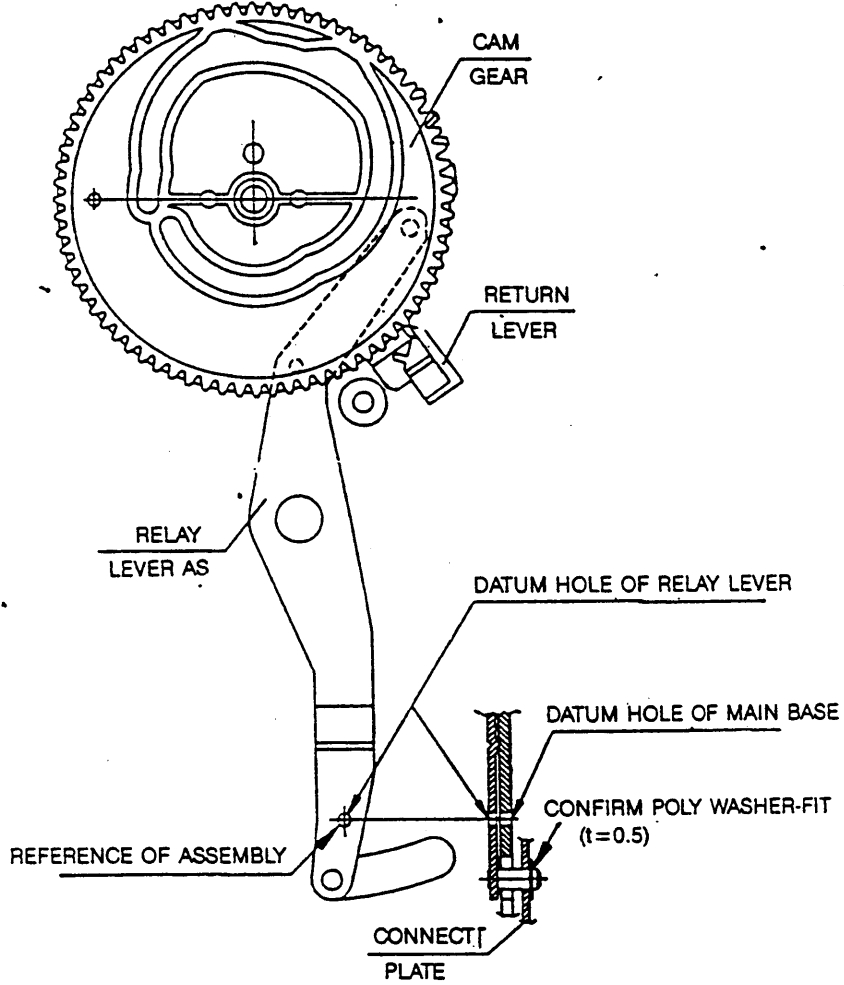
Reference of assembly for the Cam Gear and Relay Lever
